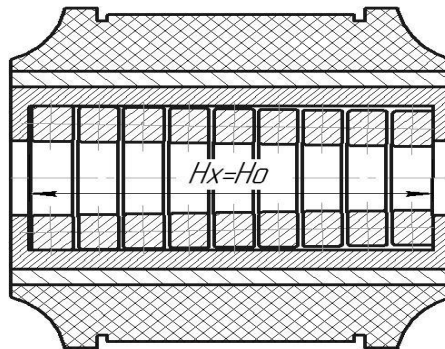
Schematic view of damper rubber bushing with movable conical box
